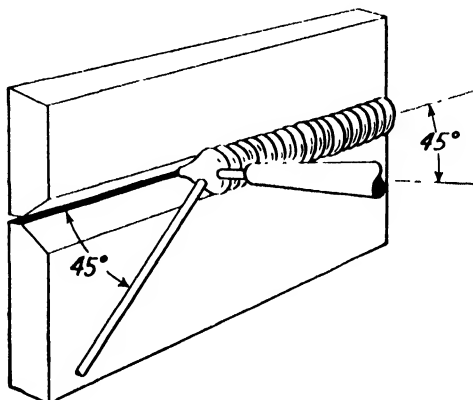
In welding in the horizontal position, carefully control the heating and add metal when the top piece just barely reaches the welding temperature.
